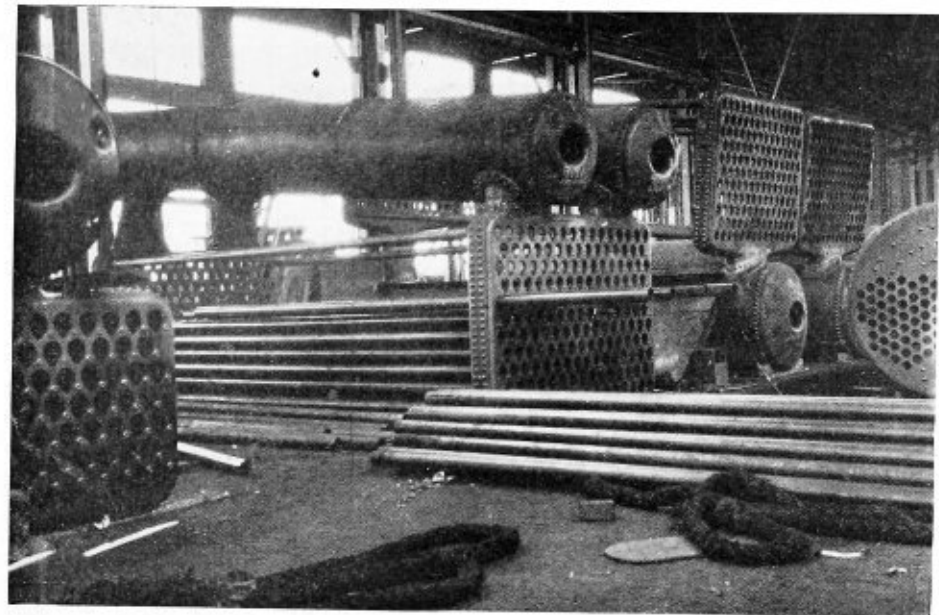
Installing tubes in horizontal drum watertube boilers
